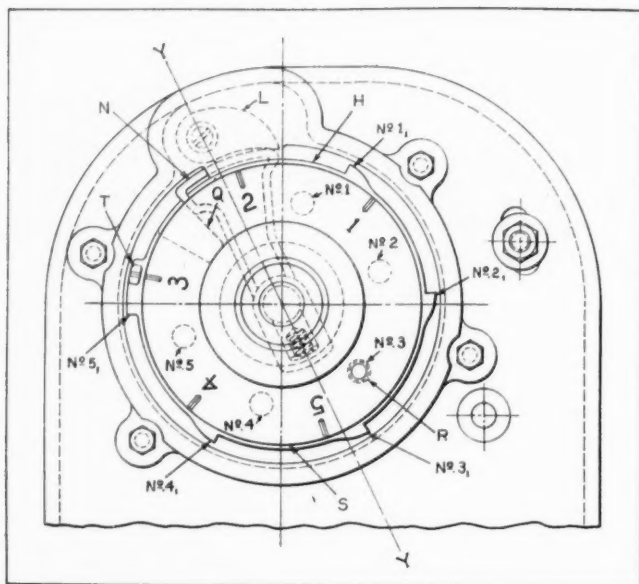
Dial Control End of Mechanism Shown in Fig. 1
